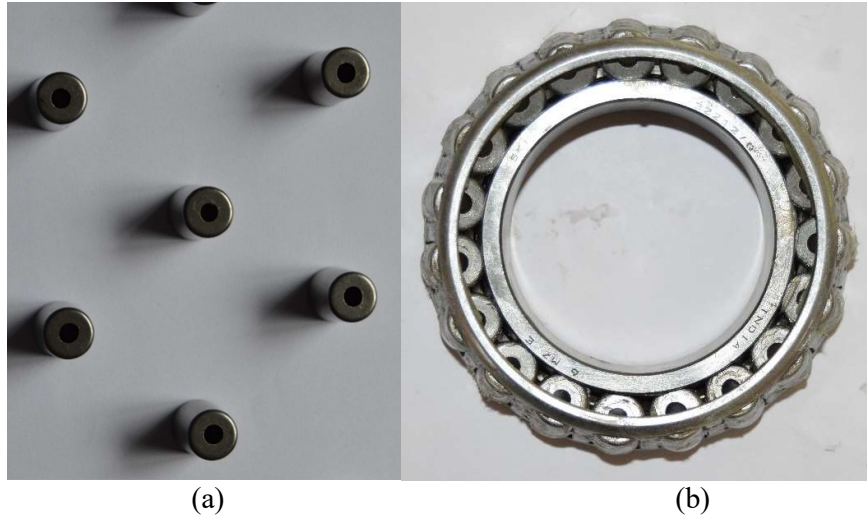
(a) 42% hollow rollers (b) Bearing with 42% hollowness
